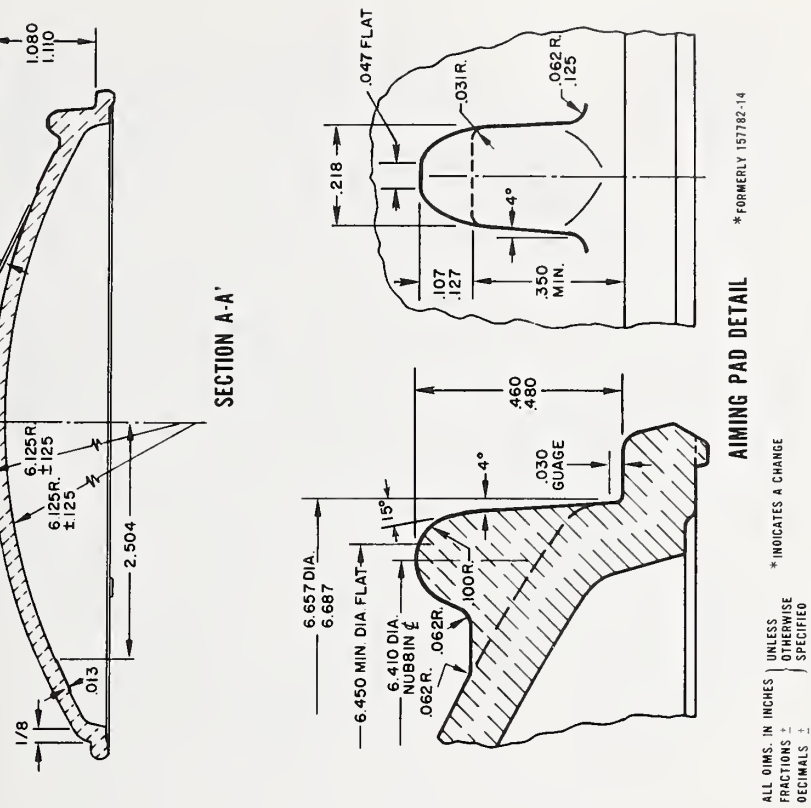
Westinghouse 6006 lamp lens detail.
